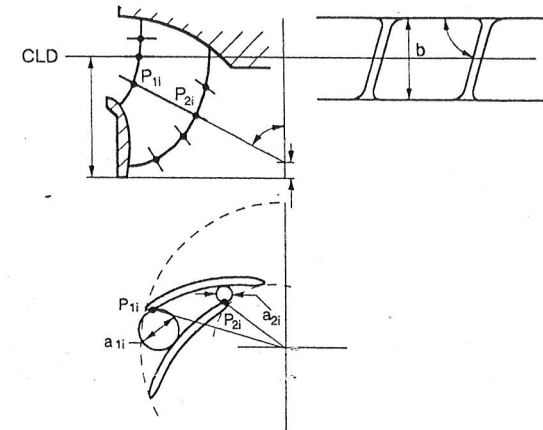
Runner/impeller of radial flow machine. Check of inlet and outlet widths between blades (example of a pump-turbine runner)
